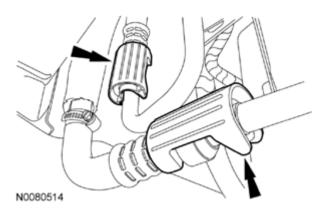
Locating Secondary Latches Of Transaxle Fluid Cooler Tubes Courtesy of FORD MOTOR CO.
